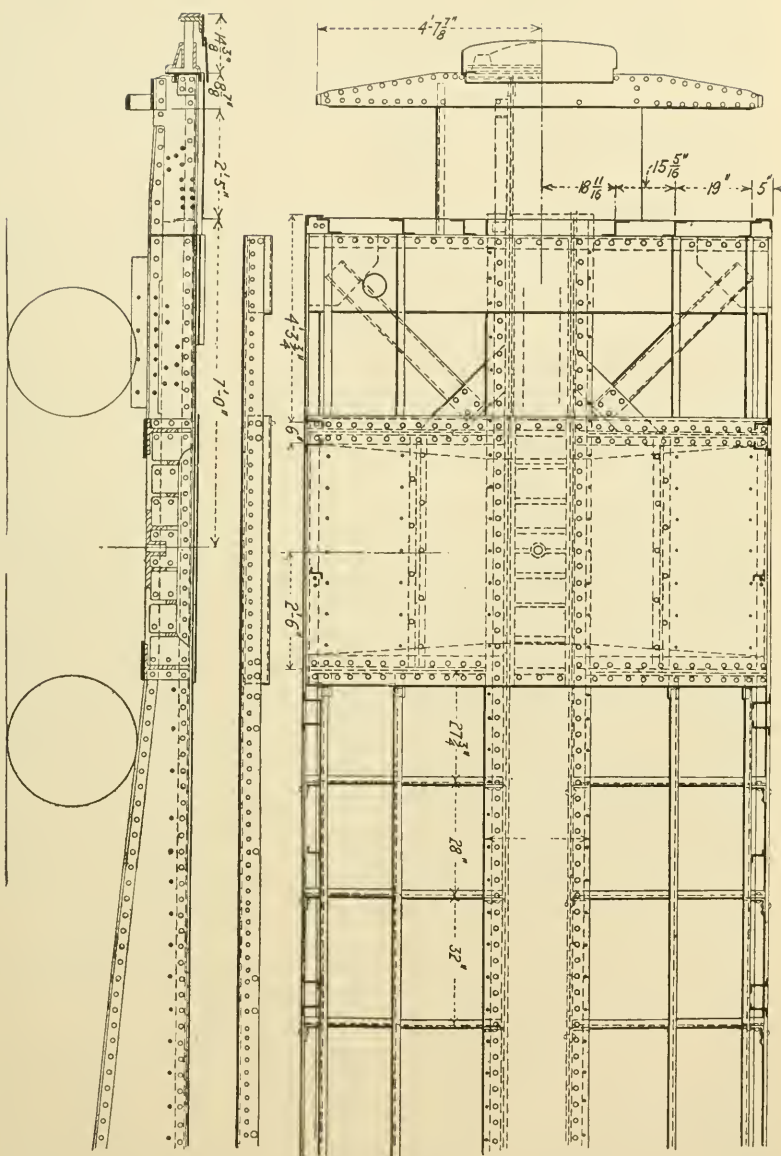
STEEL CAR CONSTRUCTION, CENTER SILLS EXTENDING FULL LENGTH OF CAR
